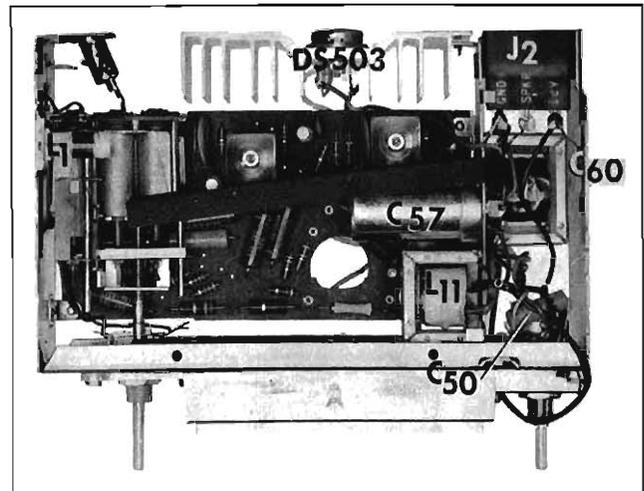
CHEVY II PARTS LAYOUT TUNER VIEW - 985957 - RADIO
